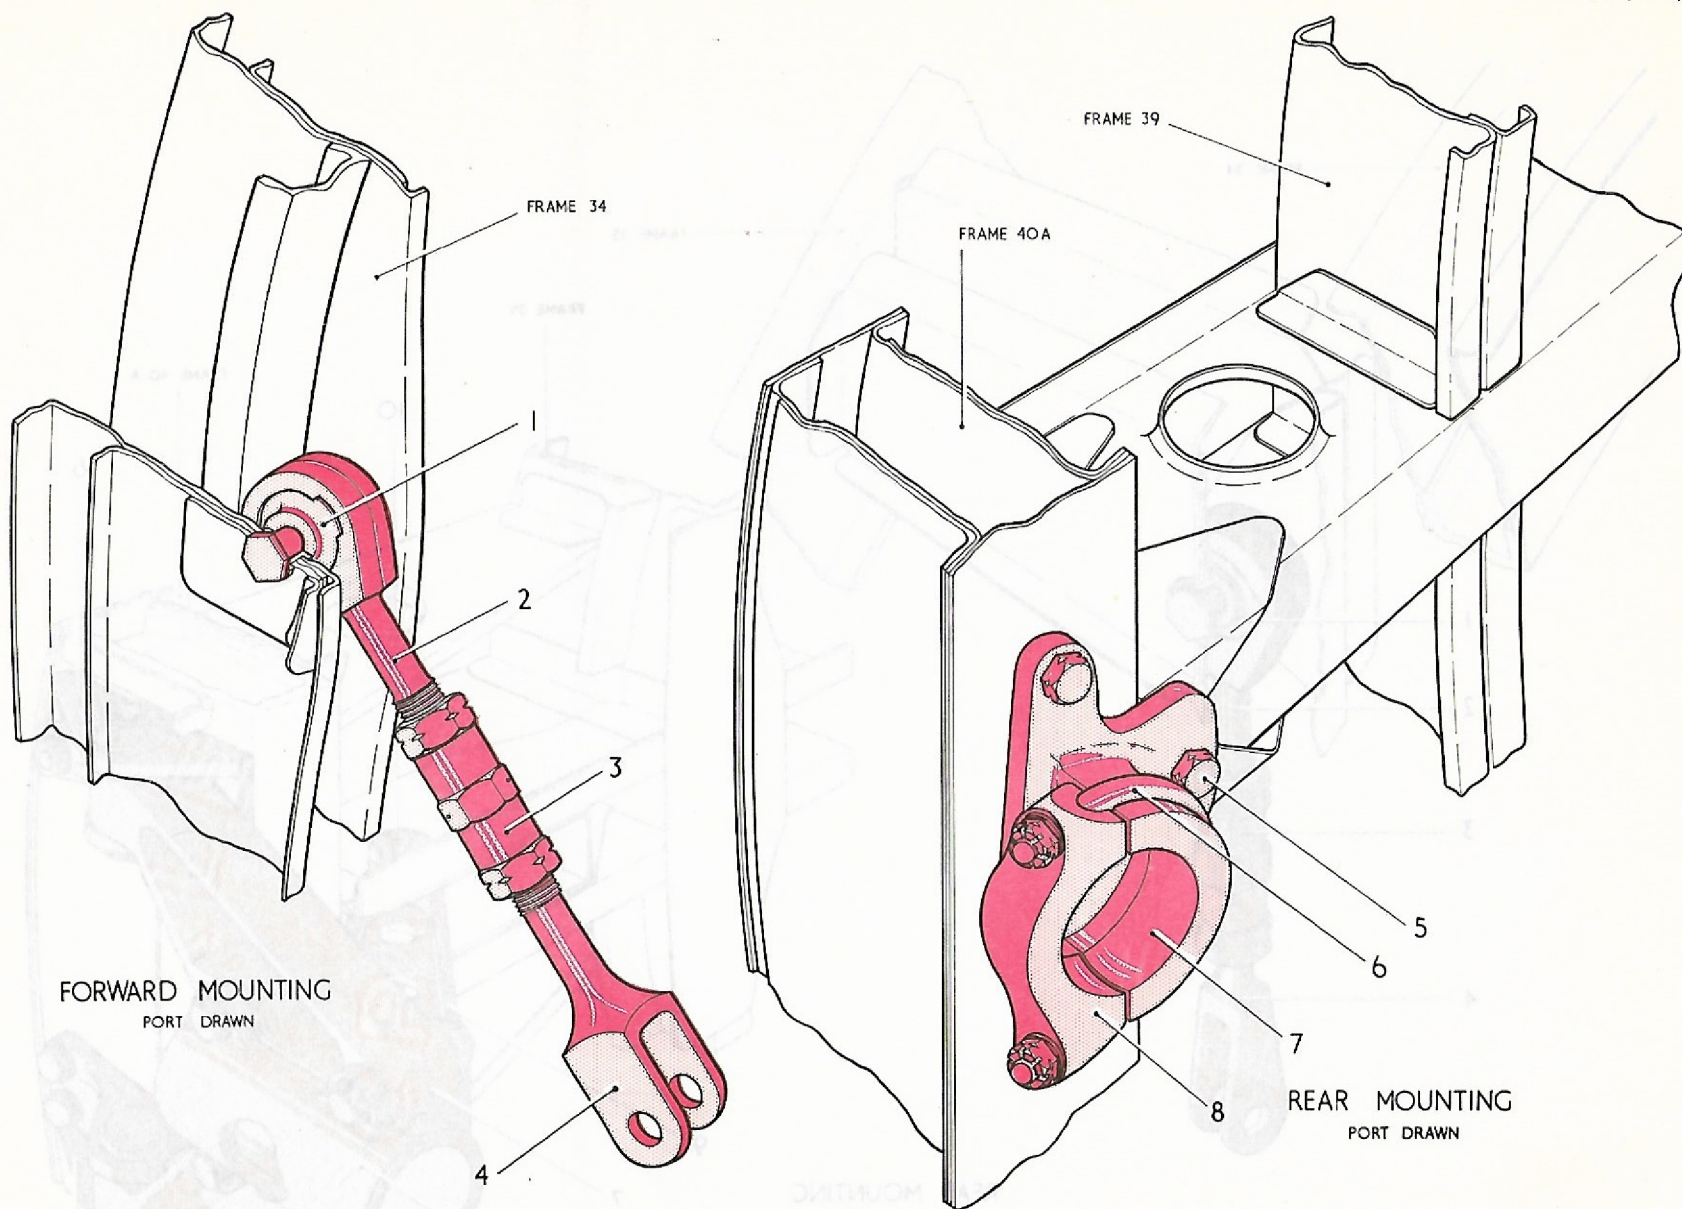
KEY DIAGRAM OF ENGINE MOUNTING -MK.4 & II
